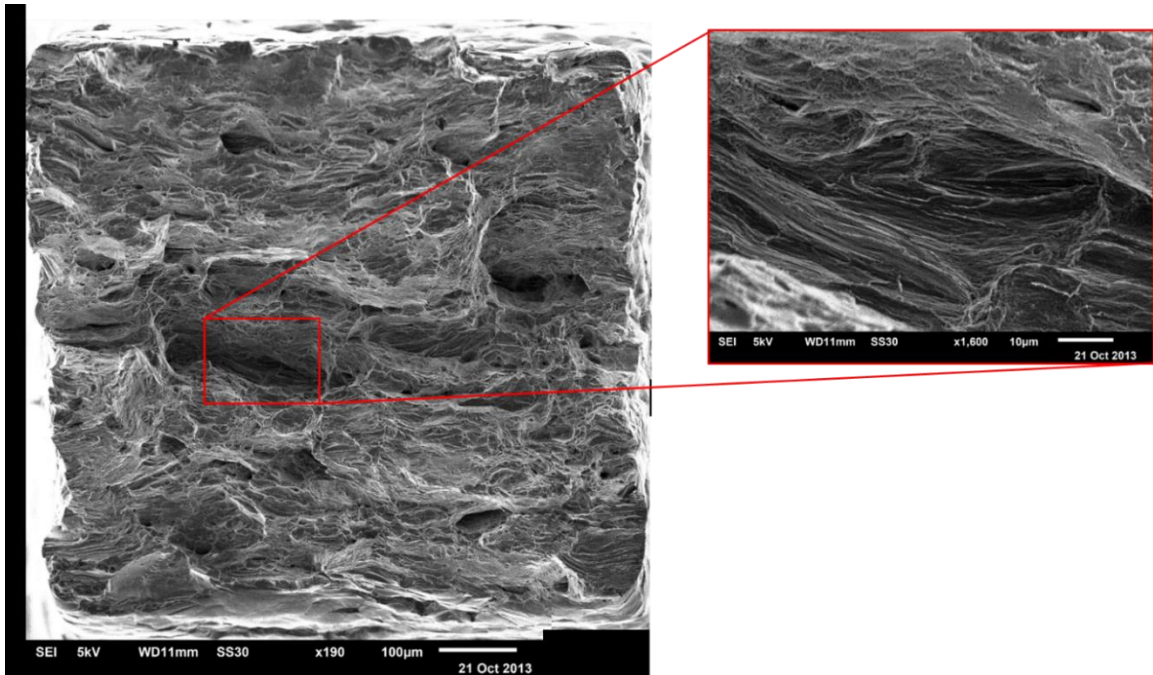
Fracture surface of tomography sample and magnified view showing the faceted characteristics.
